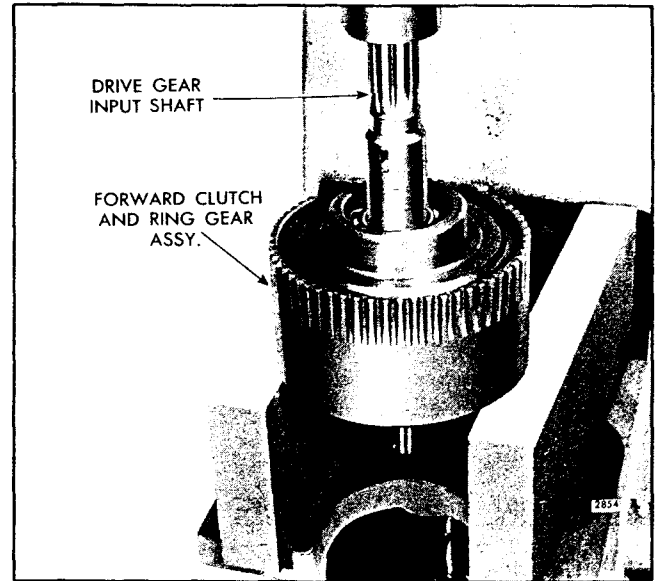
Removing Drive Gear Input Shaft from Bearing and Forward Clutch and Ring Gear Assembly
